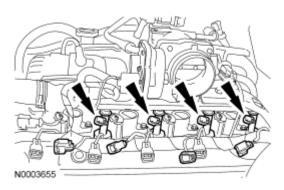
Ignition Coil Electrical Connectors Courtesy of FORD MOTOR CO.
